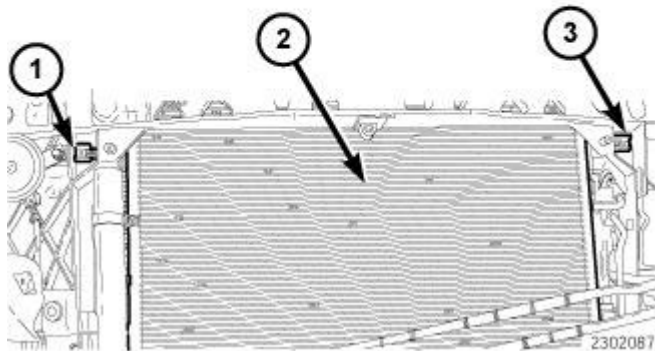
UPPER RADIATOR RETAINING CLIPS
